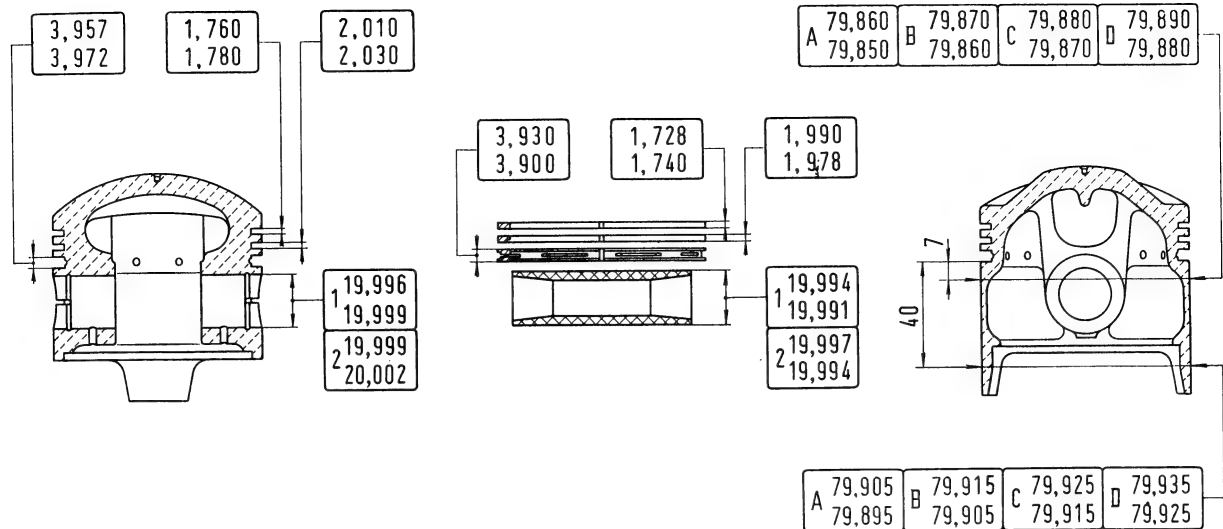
Critical dimensions (in mm) of 118 B.000 engine pistons, pins and rings. Piston and pin come for replacement in a matched set.
